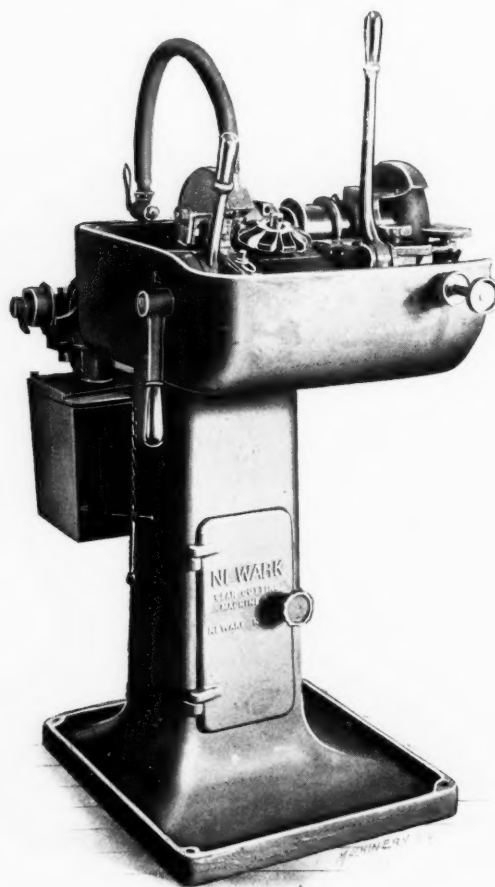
Special Water-cooled Grinder for Sharpening Formed Gear Cutters
